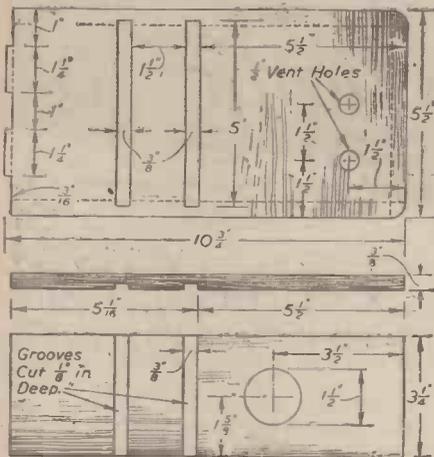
Case side and top. The bottom piece is cut similar as the top piece.
